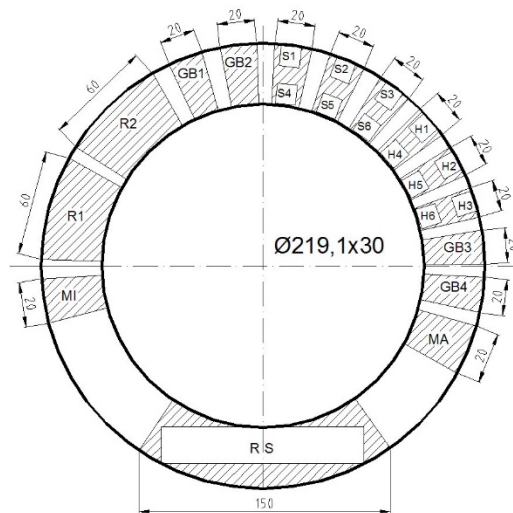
Manner of cutting specimens out of butt-welded joints of tubes
